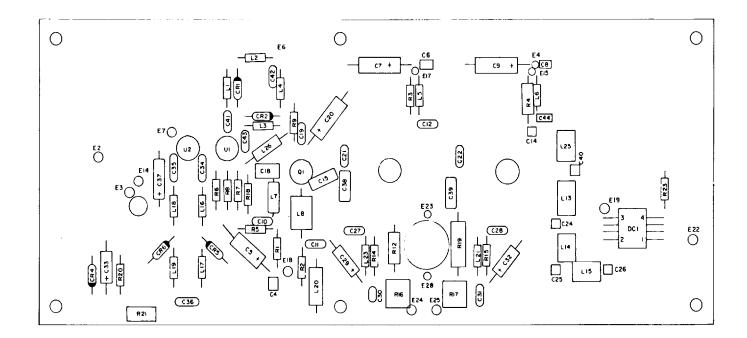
RF Amplifier Circuit Card Assembly, 1A5A2A1 and 1A5A3A1 Parts Location Diagram
